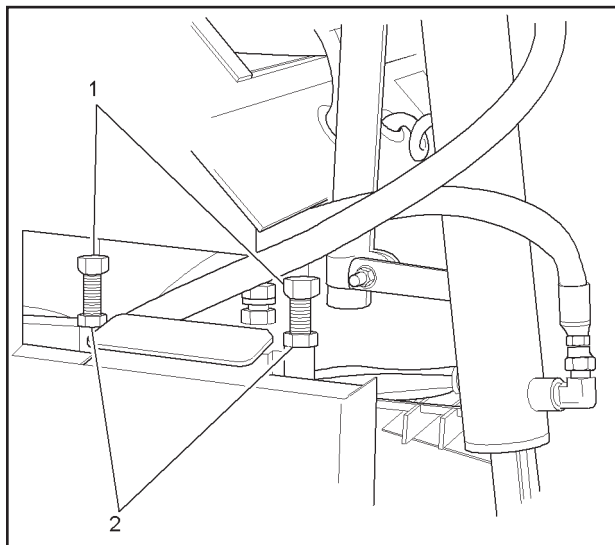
CONVEYOR CHAIN ADJUSTING BOLTS
